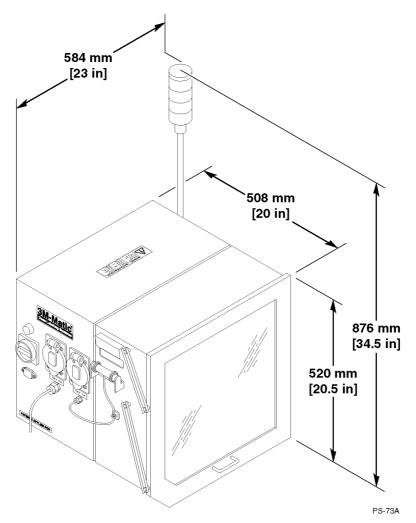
PS2000 Applicator Dimensions (Left-Hand Applicator Shown)
